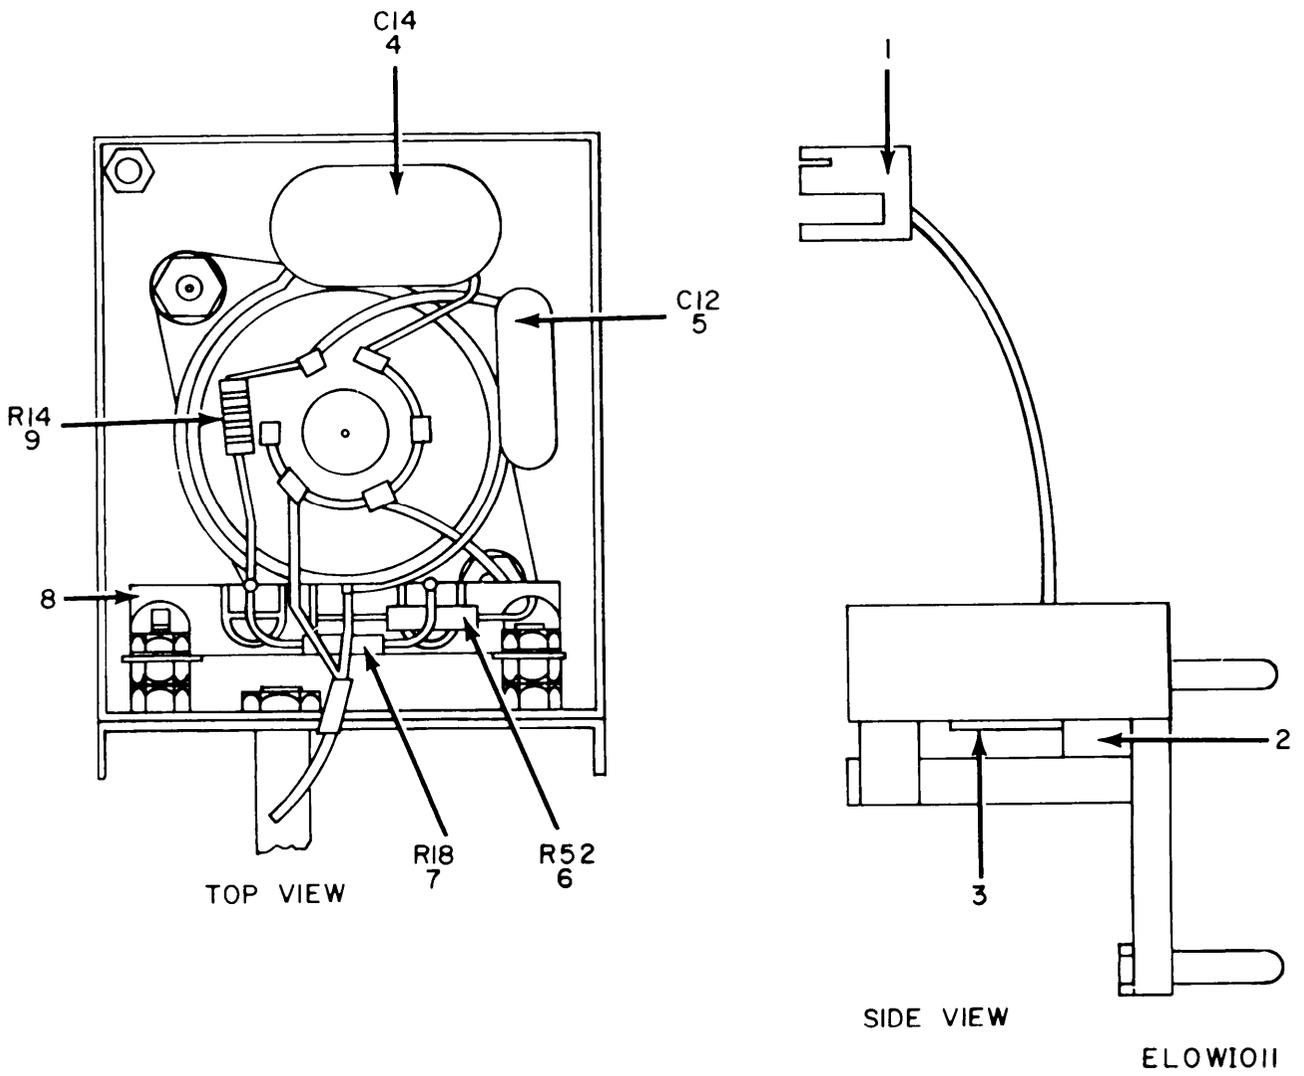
Voltmeter, Electronic ME-227/U, Adapter Assembly.
